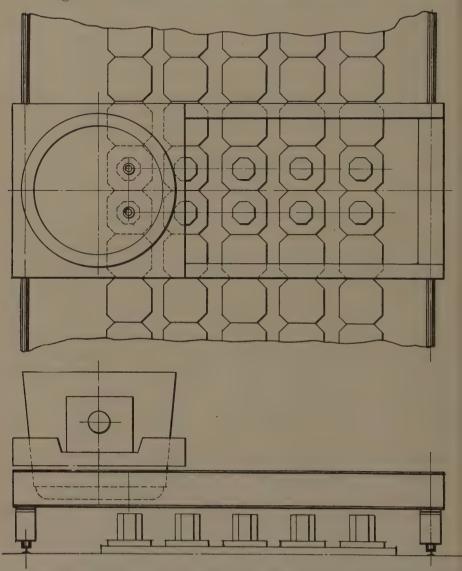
Arrangement of Open-hearth Pit Floor for casting Individual Ingots
